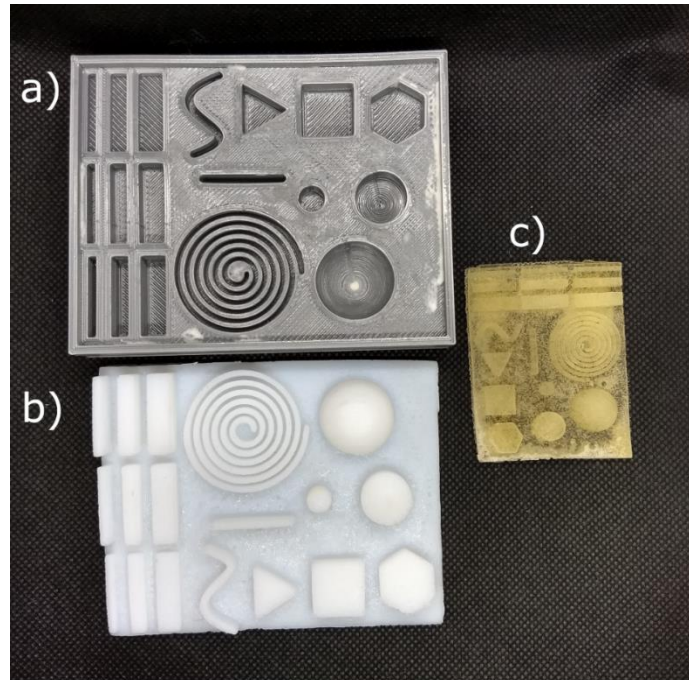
a) 3D printed universal test mold, b) PU positive mold before the shrinkage process, and c) shrunken PU positive mold.
